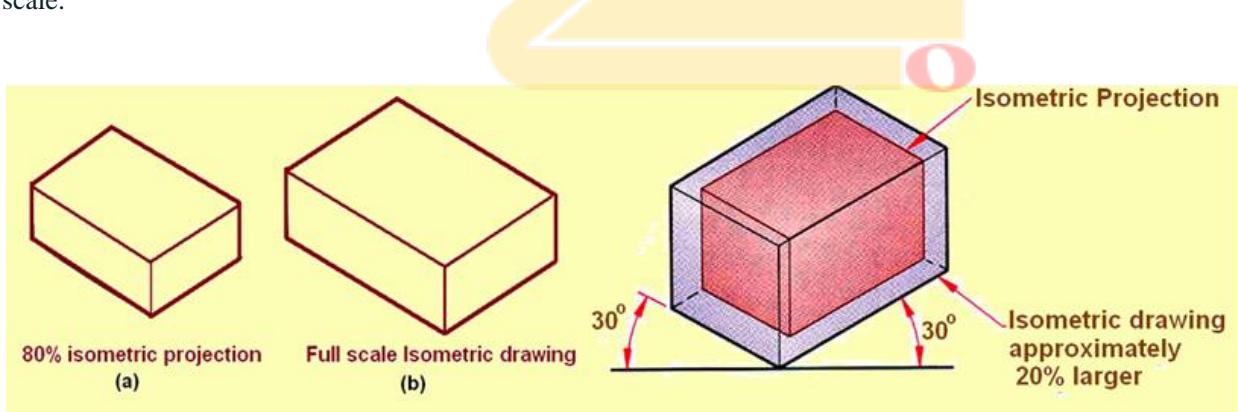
Shows the (a) isometric projection and (b) isometric drawing (or view) of a cuboid.
